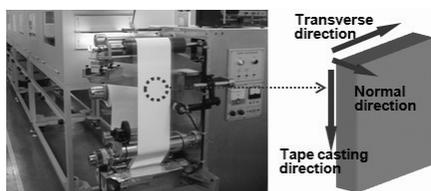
(a) Tape casting machine (b) Direction of LTCC sheet [2]
